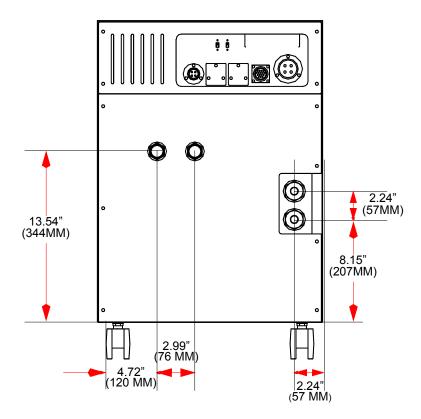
8600 Compressor Rear Dimensions, Type 01
